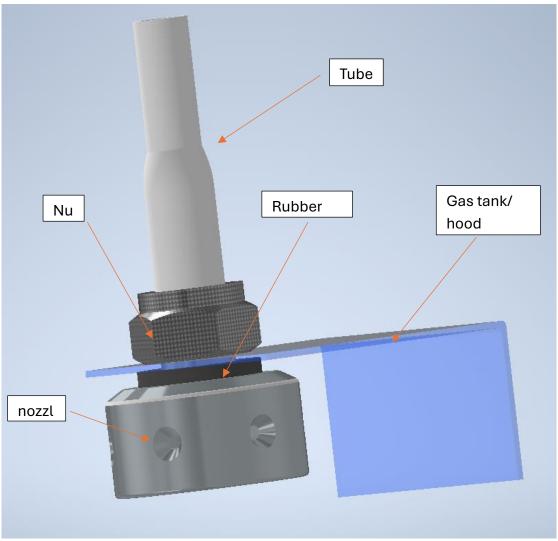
Assembly of the nozzle in the gas tank and engine compartment.
